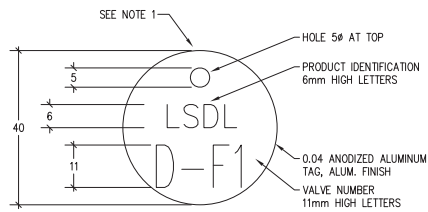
VALVE TAGS FOR DIESEL FUEL SYSTEM
